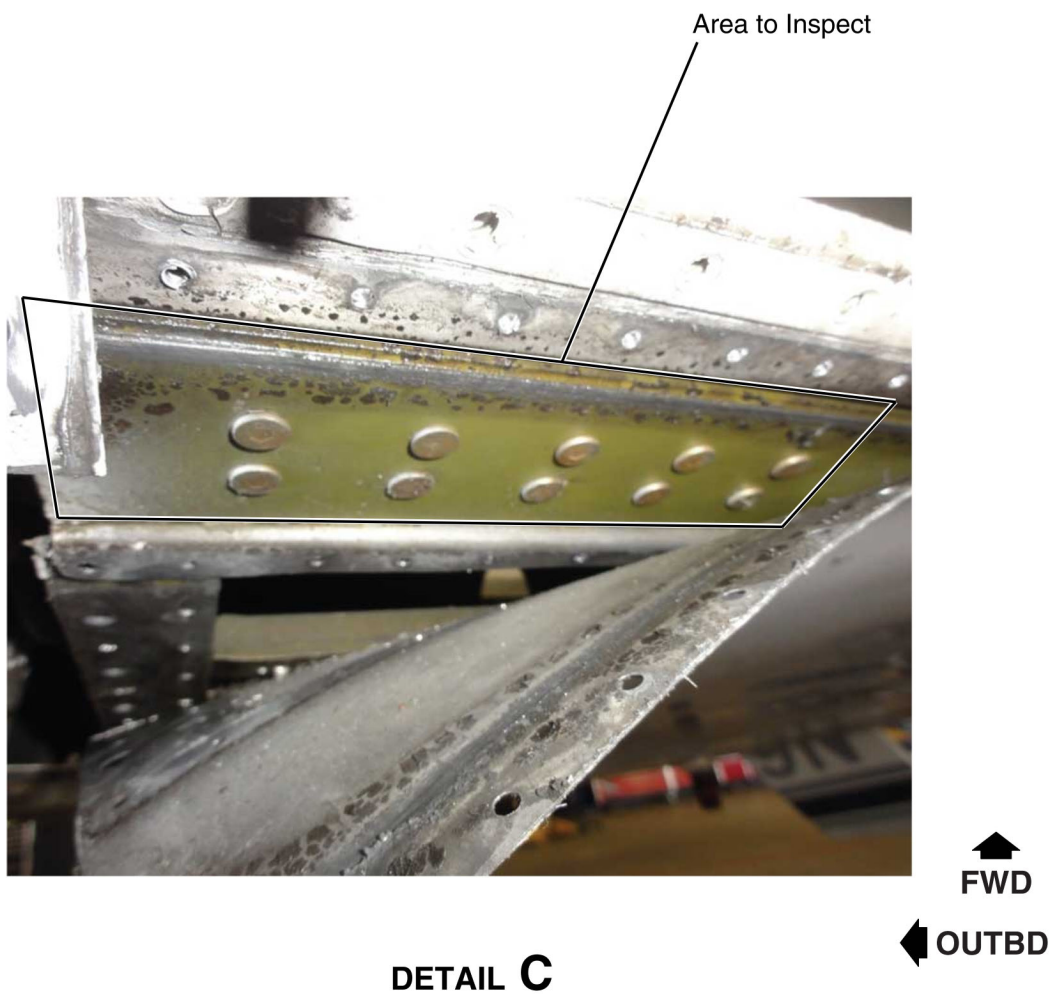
Carry-Thru Spar Cap Inspection (Sheet 3)
